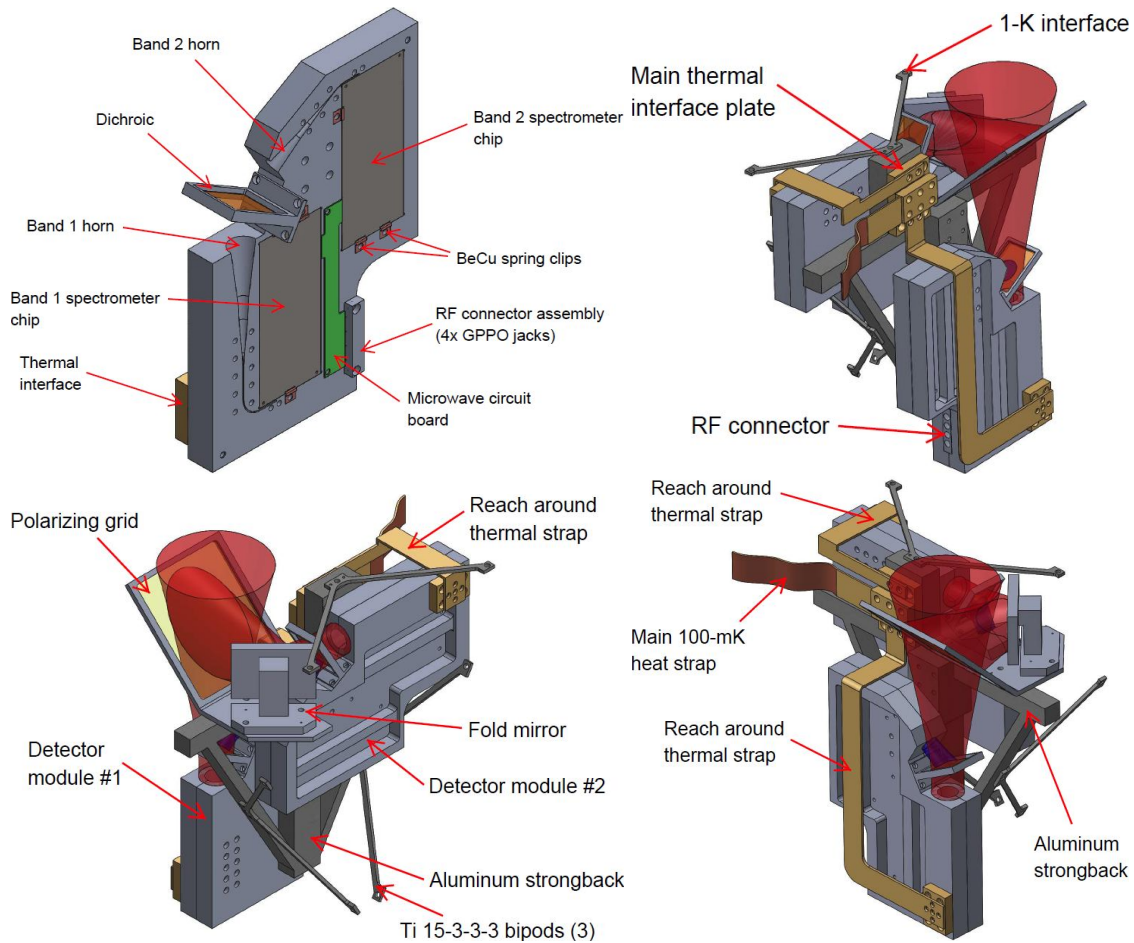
Dual-band, dual-pol 4-chip spectrometer module. Upper left shows the 2-chip housing made of E-plane split-block waveguide, with integrated smooth-wall direct-drilled feed horns and a dichroic. The other images show the full 4-chip module including 2 dual-chip housings and the polarizing grid. Red shows Gaussian beams sized at  $4w$  for  $\lambda = 1.6$  mm, blue for  $\lambda = 0.91$  mm, the long-wavelength ends of Band 1 and Band 2, respectively.
